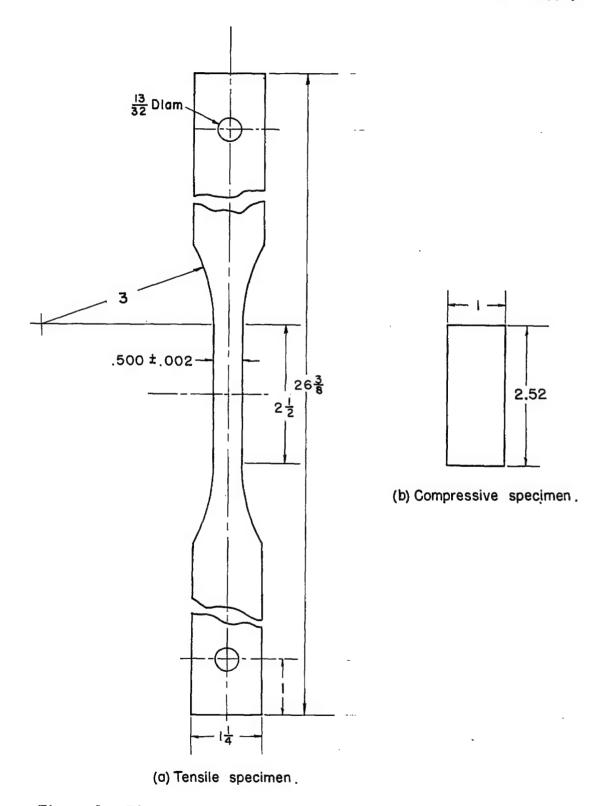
Dimensions of tensile and compressive sheet specimens in inches.
